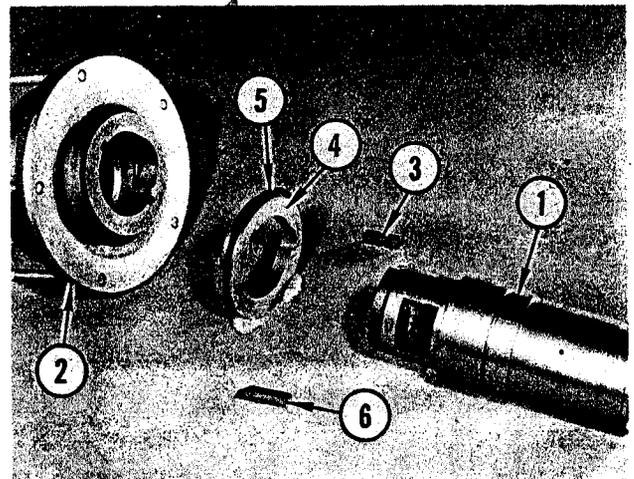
REACTOR SLEEVE DISASSEMBLY
